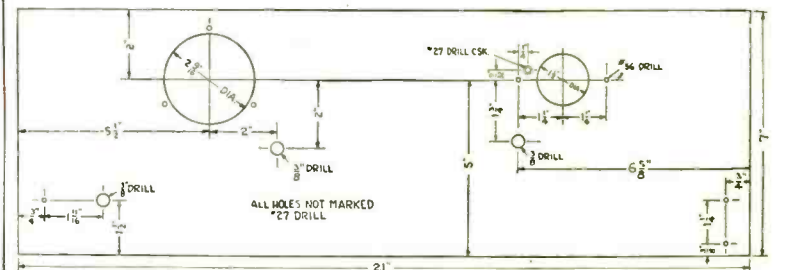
This drilling layout of front panel requires but few holes. Two are made with adjustable panel cutter.
